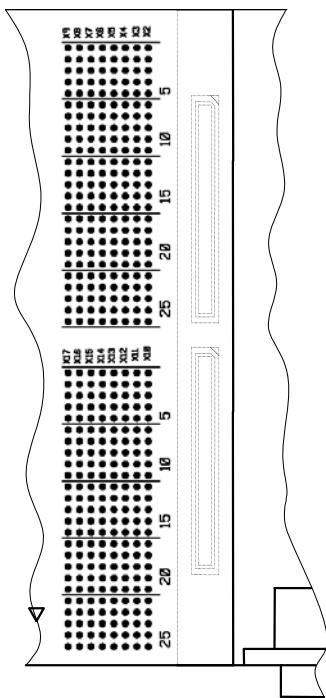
Pin Assignment Scheme of the Patch Field on the Optional GPIO Expansion Board
